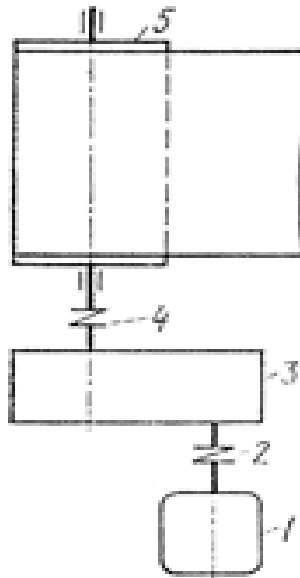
drive Diagram of a belt conveyor: 1-motor; 2,4-couplings; 3-gearbox; 5-drive drum
